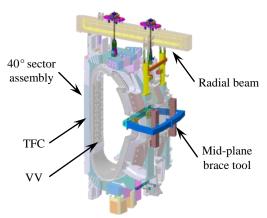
Configuration of  $40^{\circ}$  sector assembly and the midplane brace tool.
